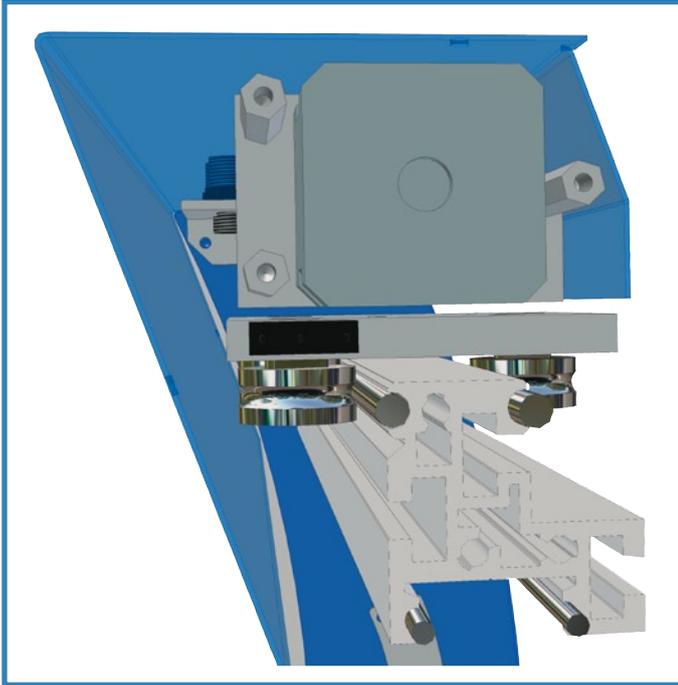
Cross-section drawing of the boring head mount on the bridge.
